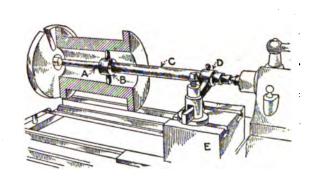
BORING A TRUE HOLE INDEPENDENT OF THE CROSS-SLIDE AND SHEARS
